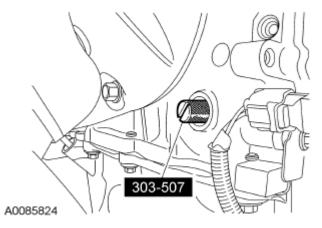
Identifying Crankshaft TDC Timing Peg (303-507) Courtesy of FORD MOTOR CO.
